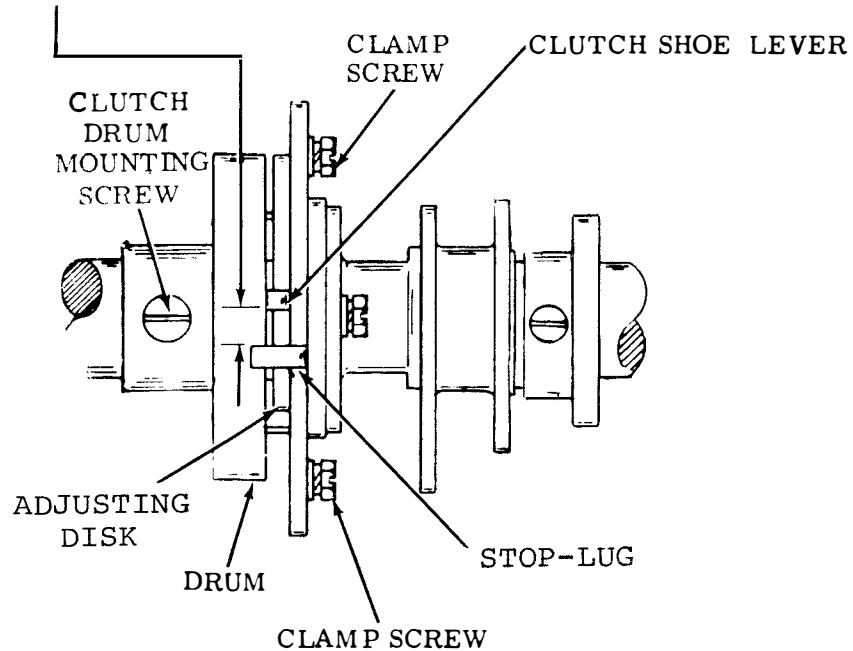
Selector Clutch Shoe Lever, Right Side View
